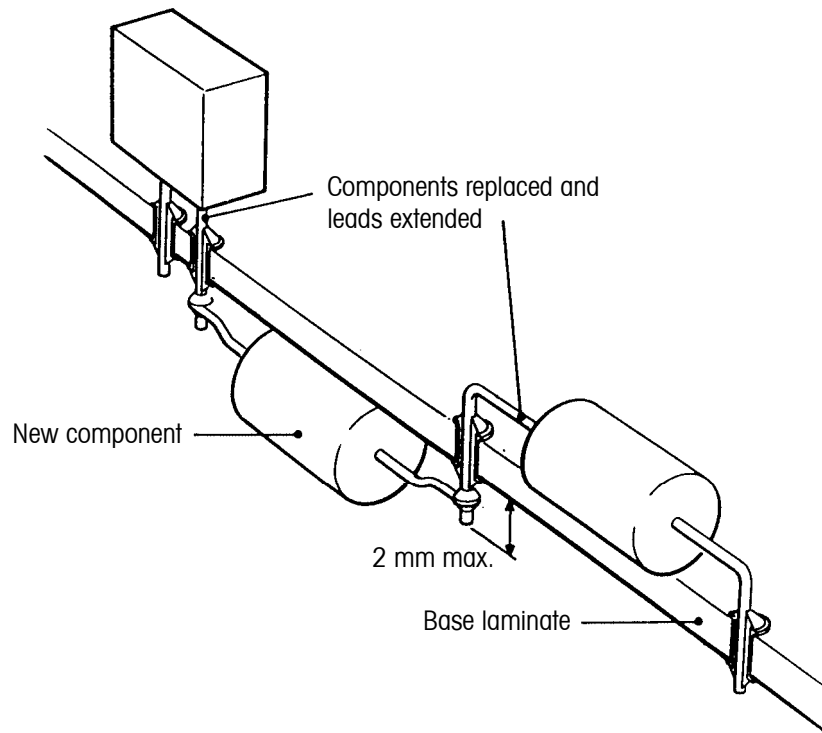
Mounting of additional component (on reverse side of board) across extended leads of adjacent components
